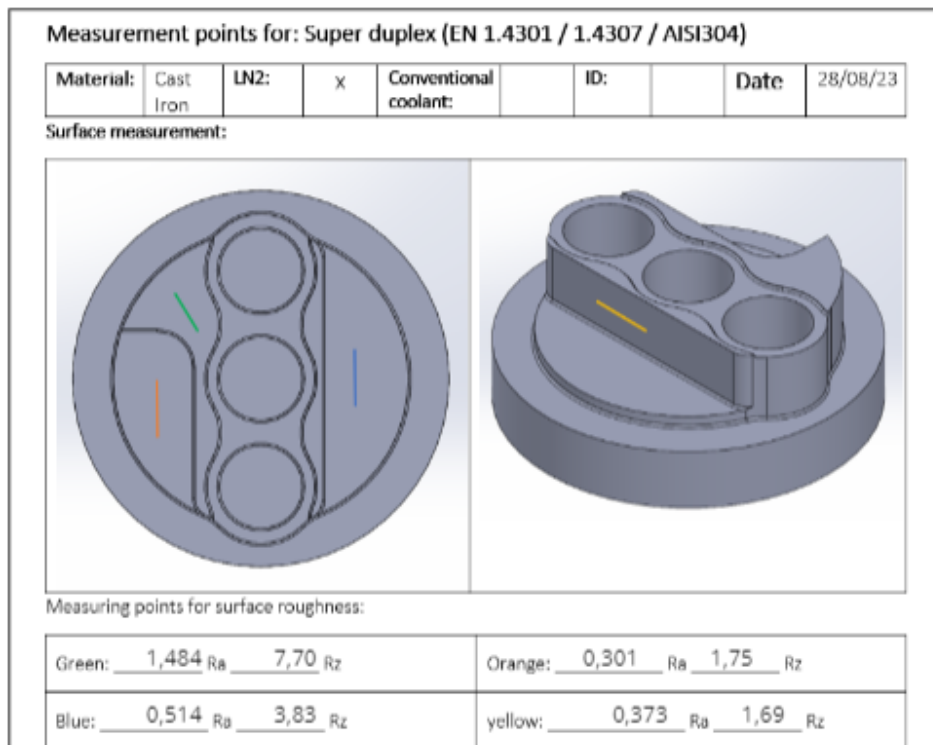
Geometrical and Dimensional Tolerance measurement – Data sheet Super Duplex-A-O/W.
